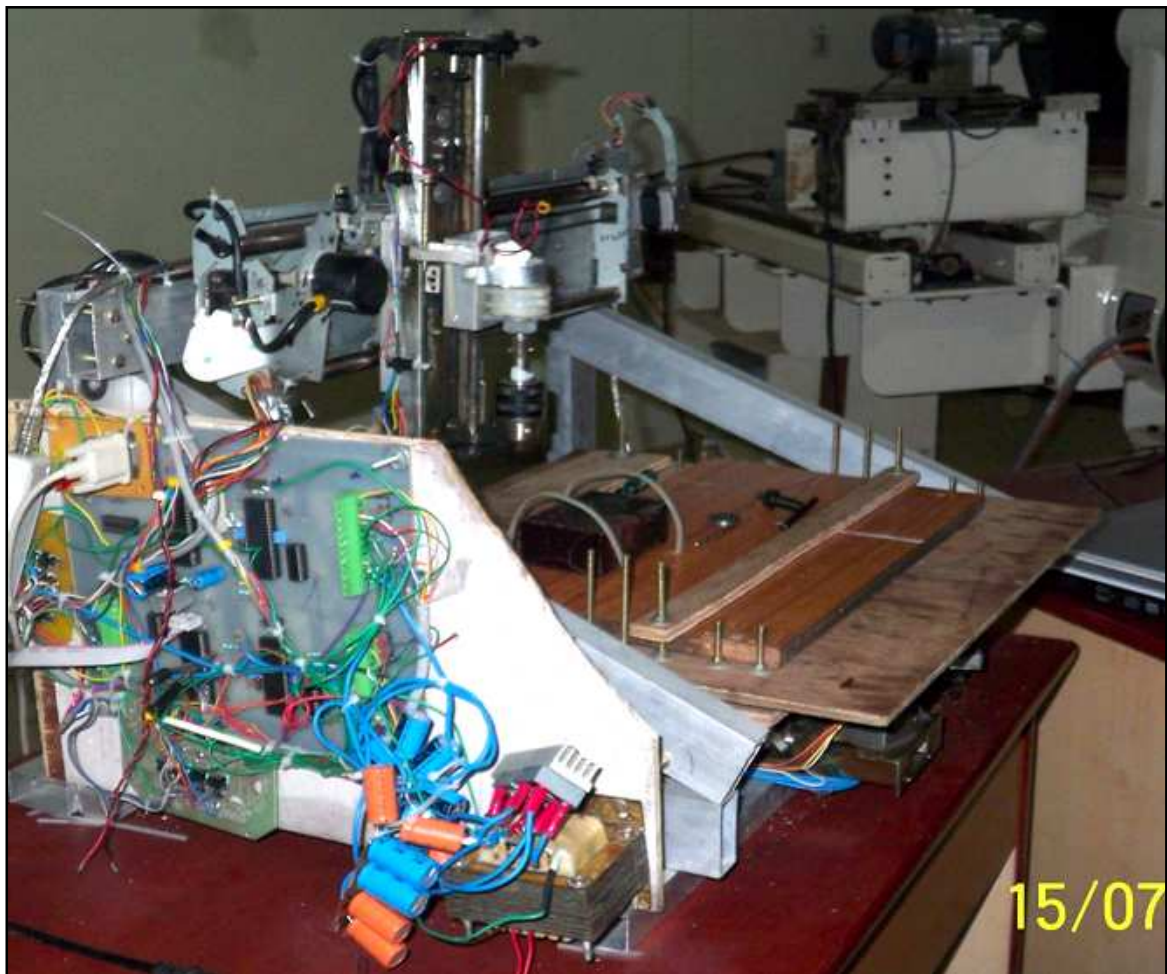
Fabricated 3-Axis NC Milling Machine.
